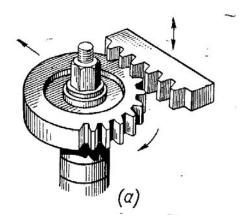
External gear teeth generation by rack type cutter (Sunderland method)
